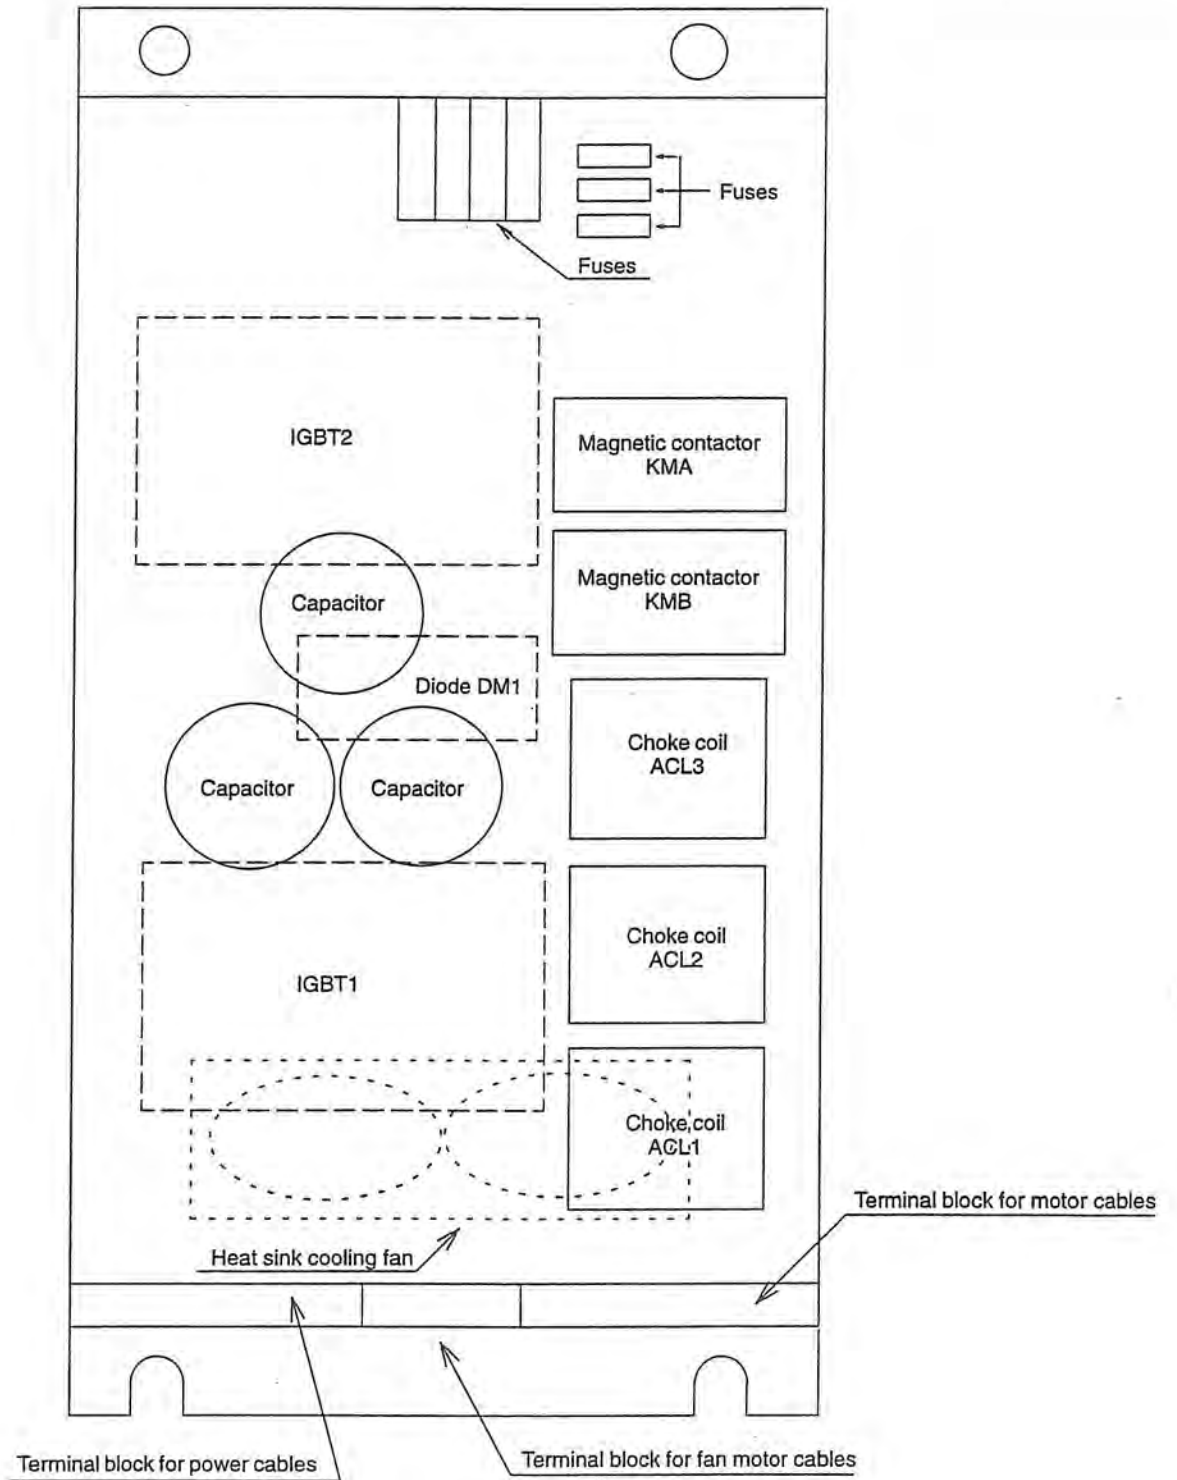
Arrangement of Major Component Parts on Power Unit for D6
